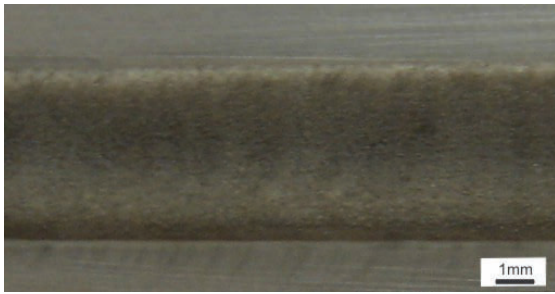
A view of the MCMgAl3Zn1 cast magnesium alloy face weld after laser treatment with TiC, scan rate: 0.75 [m/min], laser power: 1.2 [kW]
